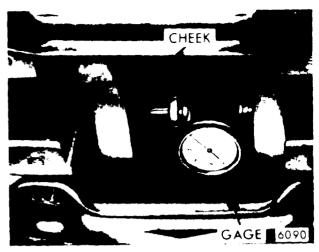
B-78. Crankshaft Distortion Gauge Mounted on Crankshaft
